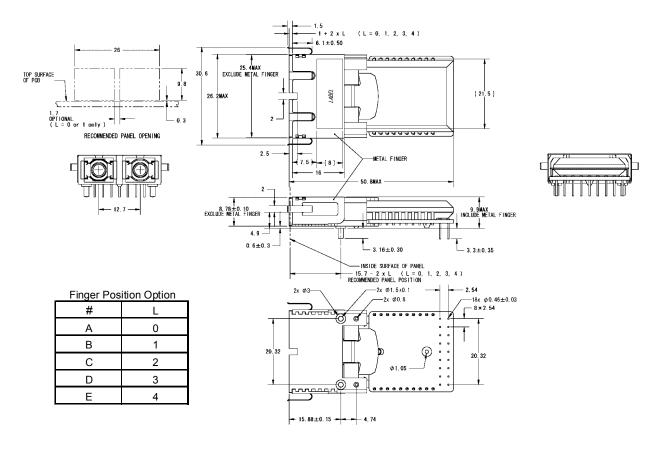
Outline Dimensions (SCM 7302-GC-#N / SCM 7302-GC-#W)
